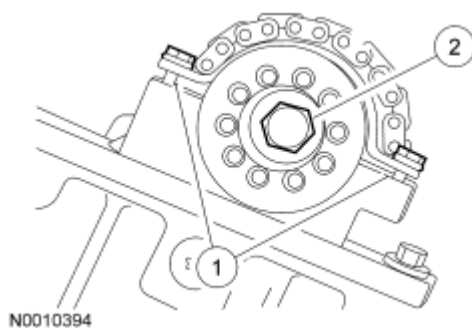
Identifying Camshaft Bolt & Clamp Bolts
